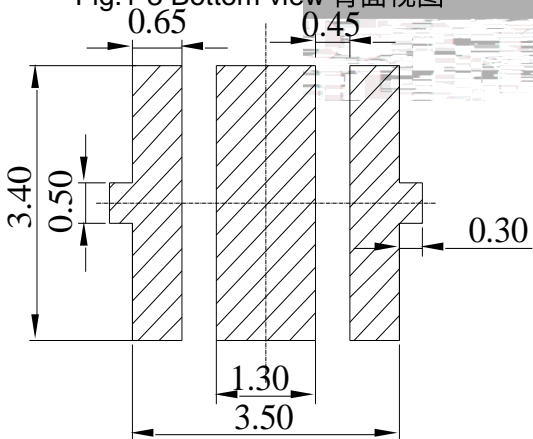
Soldering patterns 推荐焊盘
